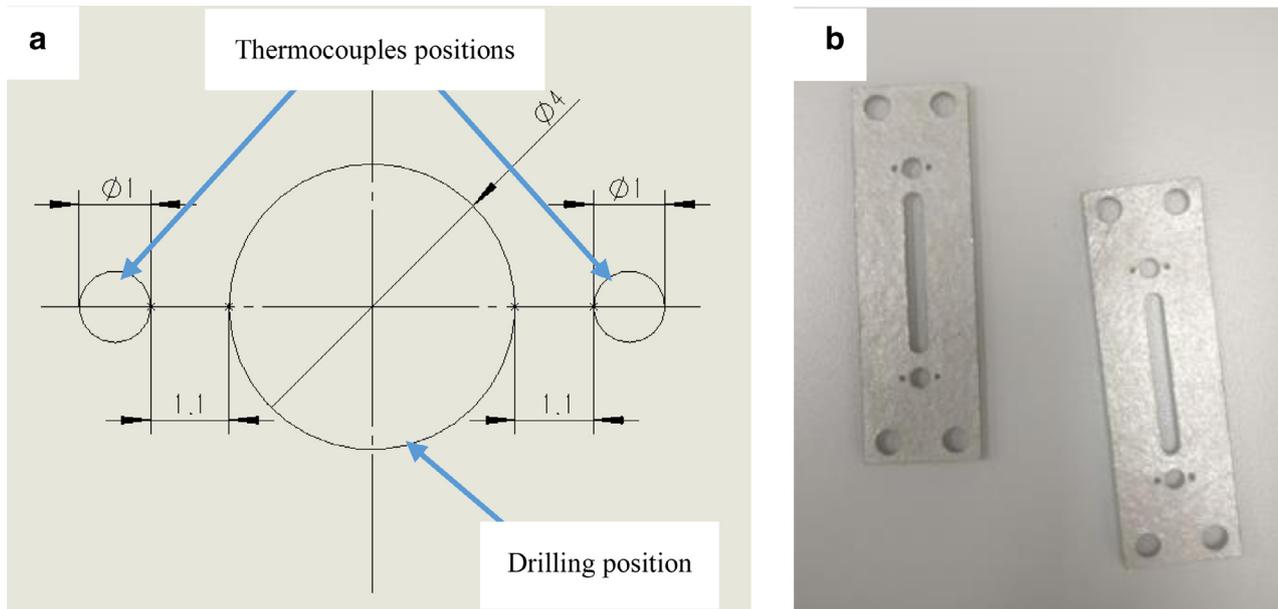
(a) Positions of inserted thermocouples, and (b) The guide plates.
